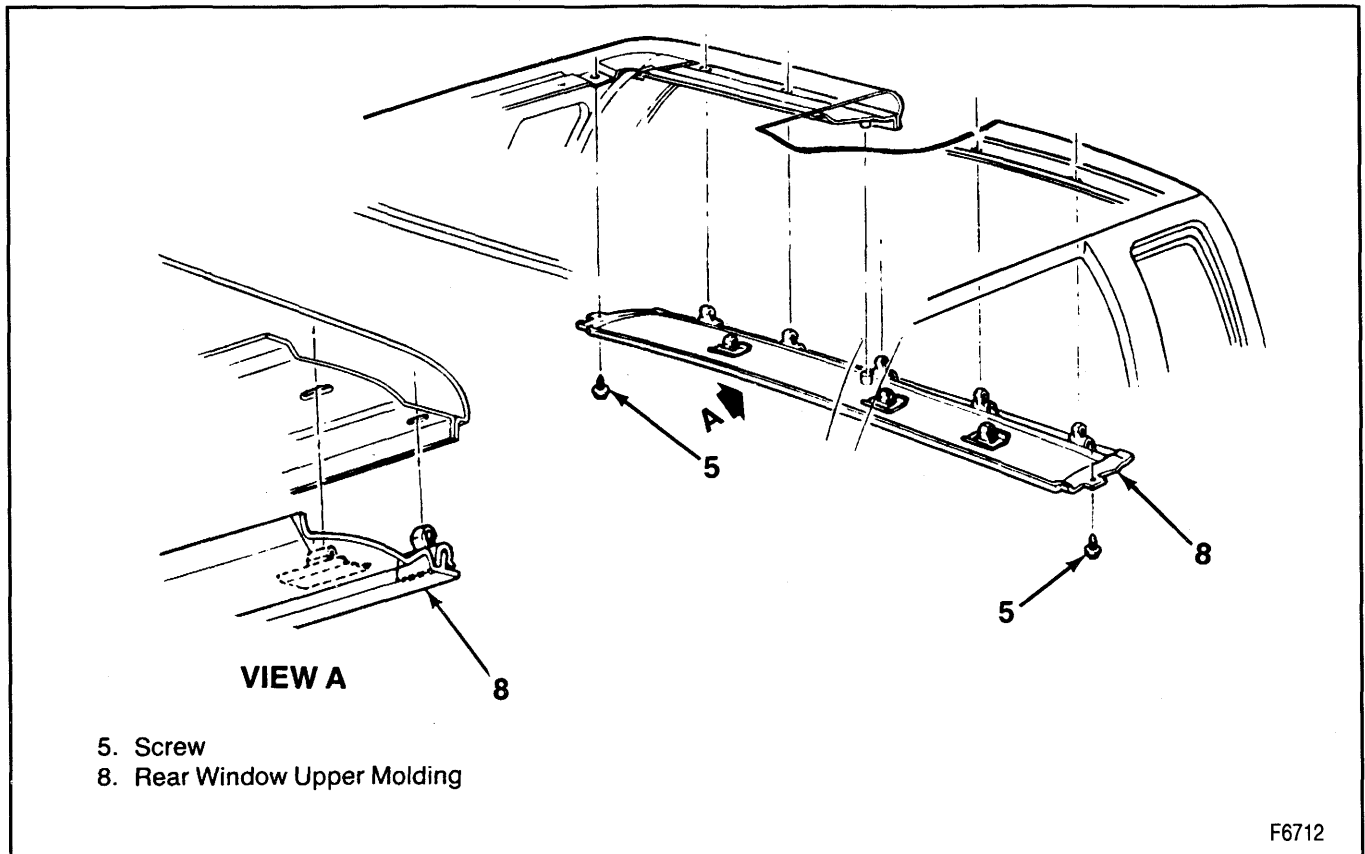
Rear Window Upper Garnish Molding (Extended Cab)
